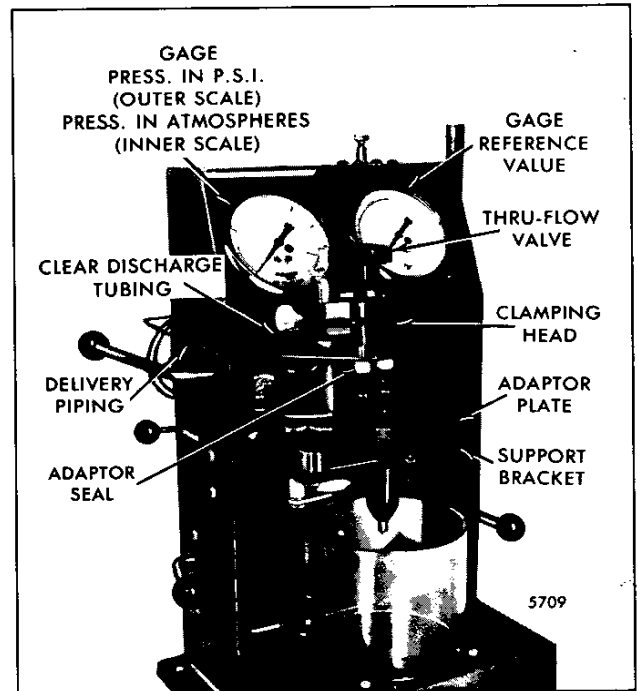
Injector Installed in Tester J 23010-A with Clamping Head
